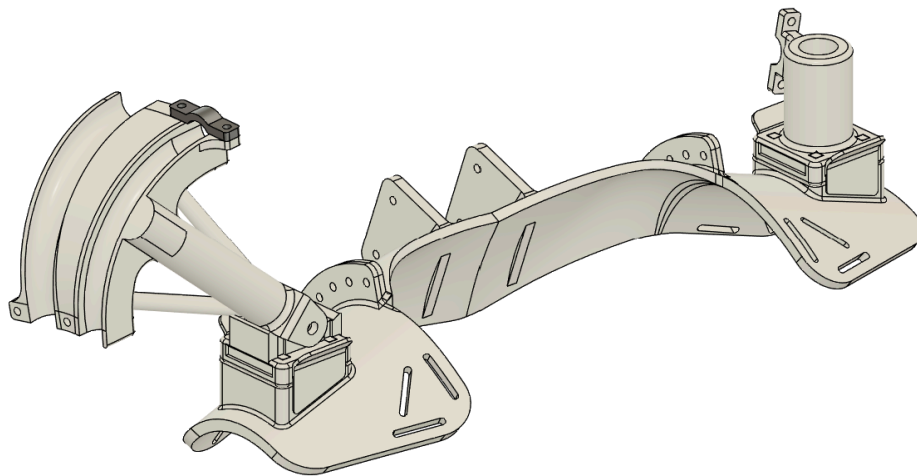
CAD assembly of final design iteration. Pneumatic muscles are not shown.
